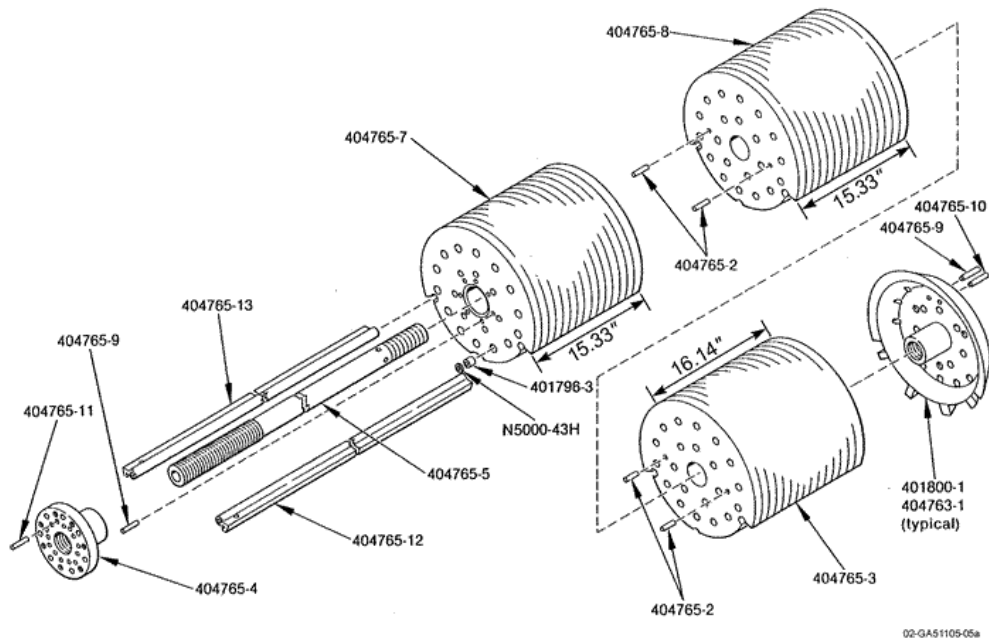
A schematic of a disassembled outer shim control cylinder showing its key components.
